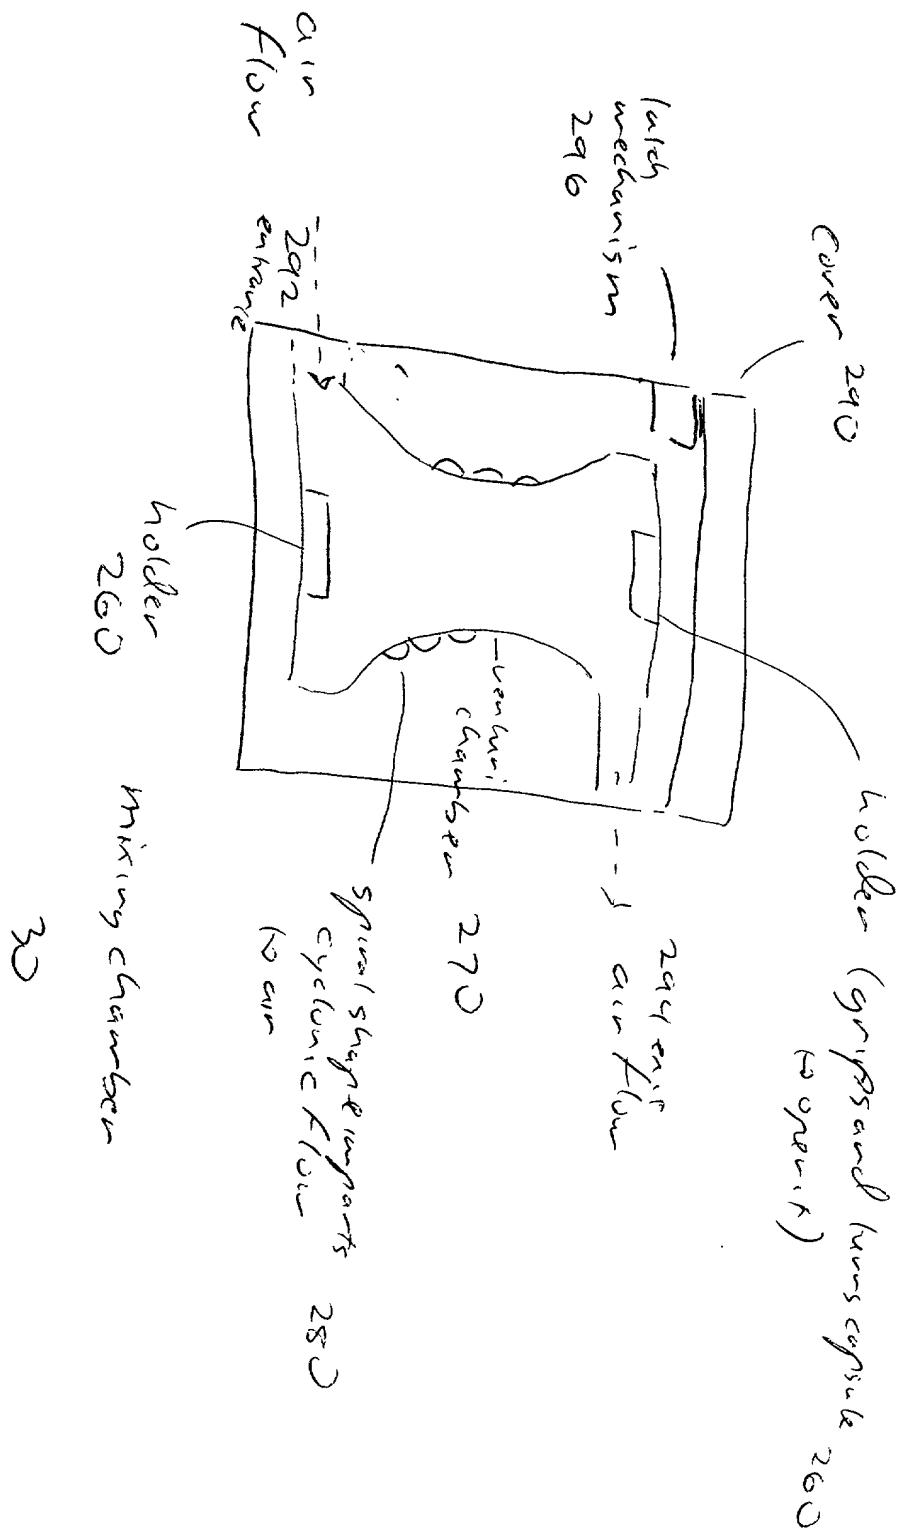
A mixing chamber assembly consisting of a central vertical tube with various components.
